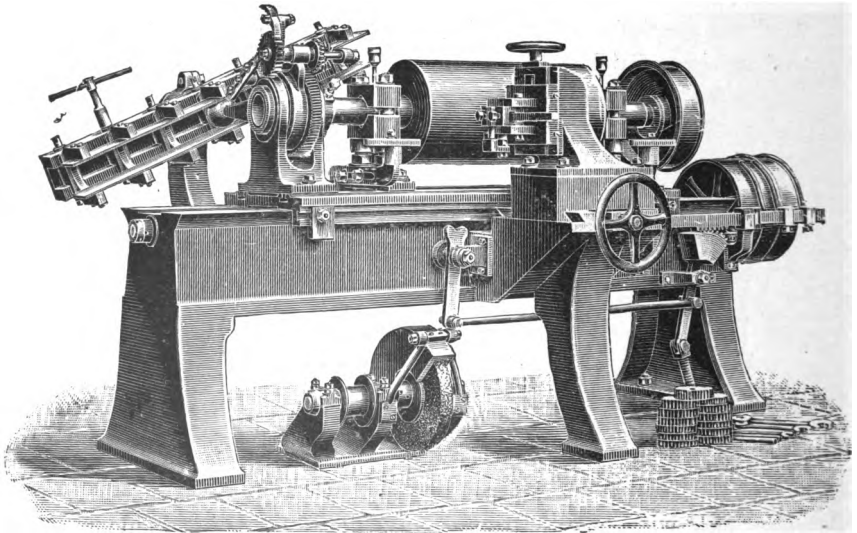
Automatic Chilled Roller Grinding and Rifling Machine.
